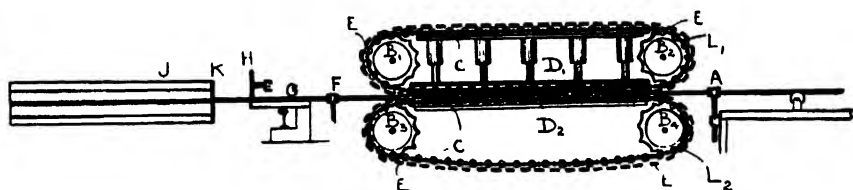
THE DANNER TUBE-DRAWING MACHINE.
